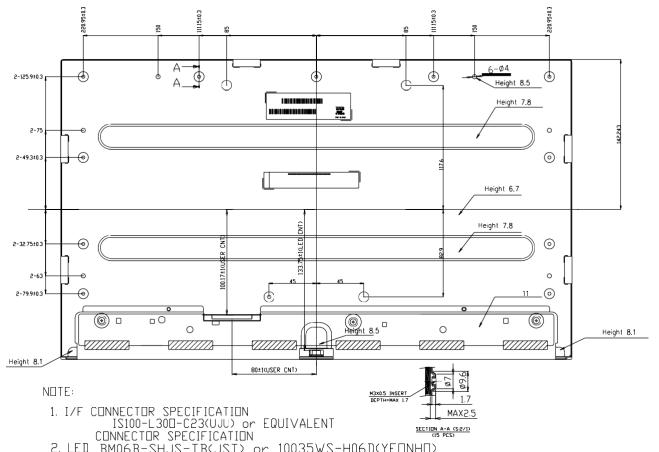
TFT-LCD Module Outline Dimensions (Rear view)
